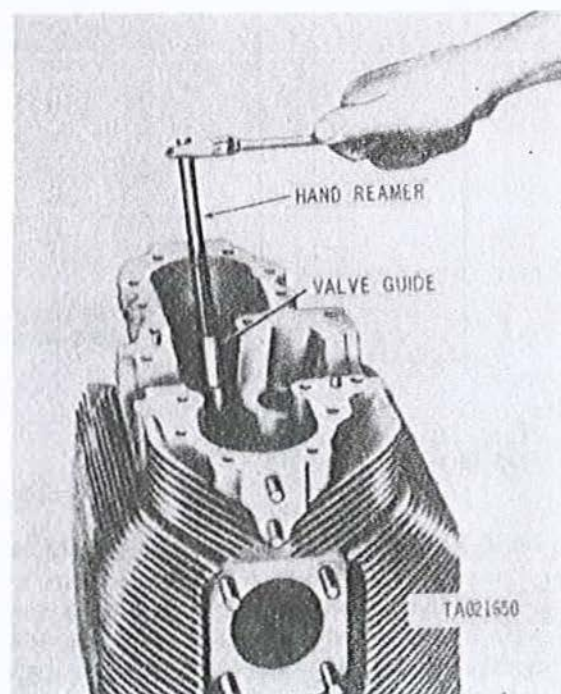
Reaming intake valve guide, using hand reamer and reamer bushing.
